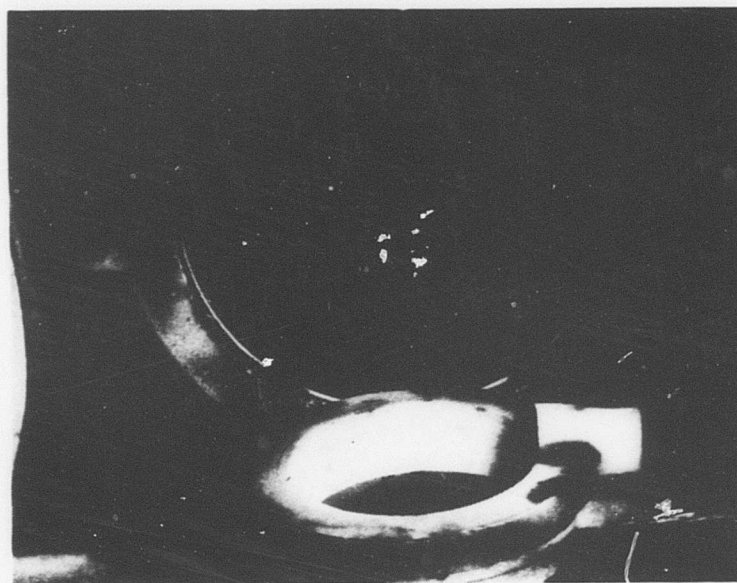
No Cracks in the Input Pinion Roller Bearing Bore of S/N 1 Housing.
